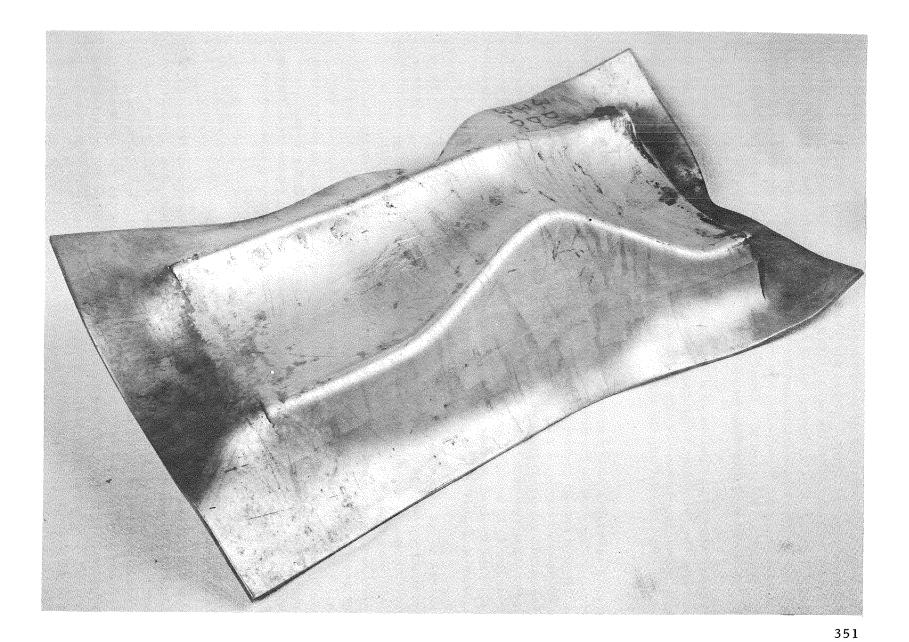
STAINLESS STEEL RIB MOCK-UP EXPLOSIVELY FORMED FROM FLAT PLATE USING SEGMENTED DIE
